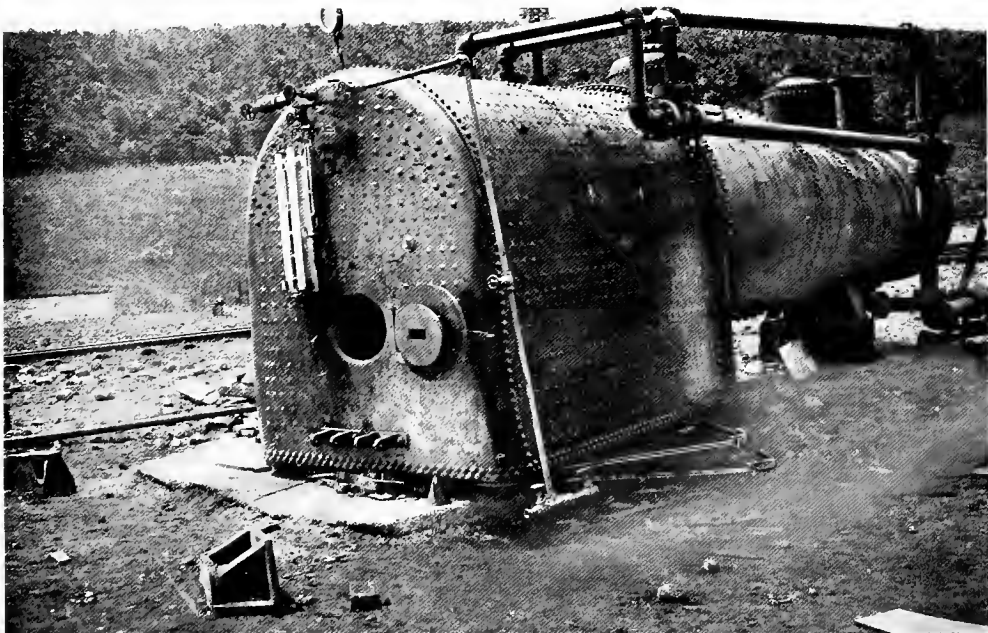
Another view of the radial-stay boiler after the low-water test, showing final position of boiler after its failure. In the foreground will be observed the supporting pedestals, one of which was broken.
